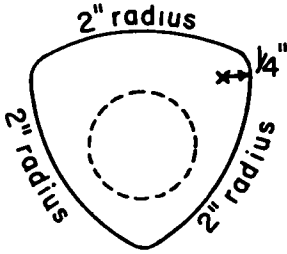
Outline of tamper shoe for AASHO Method T173 kneading-type mechanical compactor (122).
